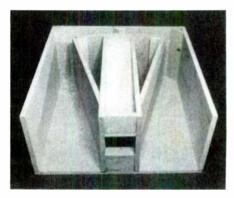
Position the manifold assembly in the box module and check all the angles before gluing in place.
